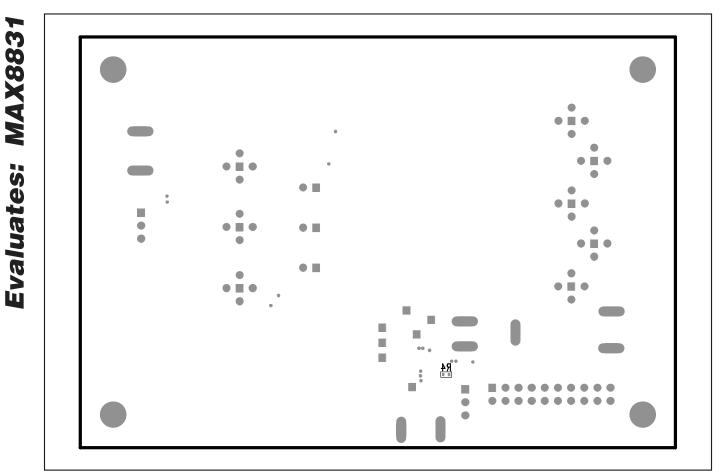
MAX8831 EV Kit Component Bottom Placement Guide—Solder Side
